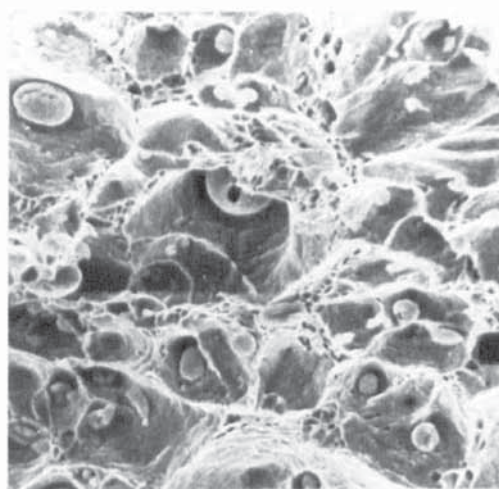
b. Ductile fracture surface, Steel D12, 1.1K.
